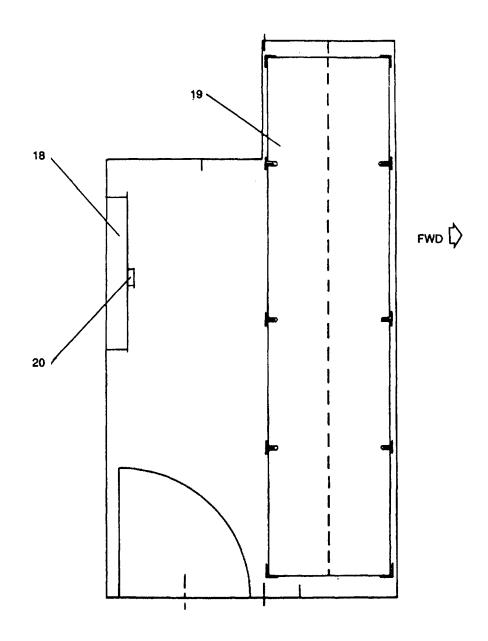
Enclosed Operating Station and Special Tools Locker (Sheet 2 of 2).
